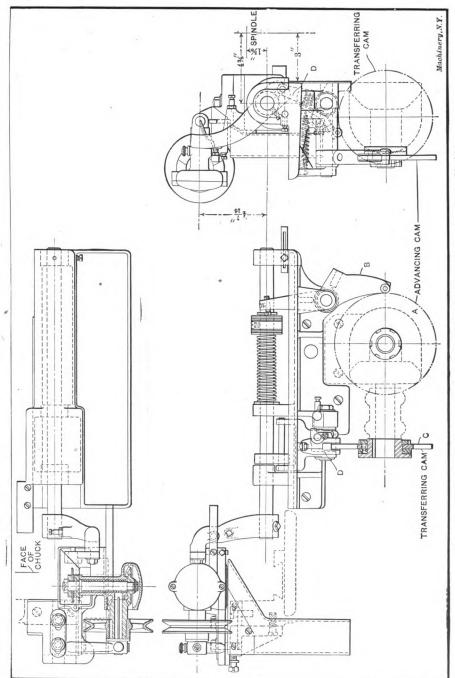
Screw-slotting Attachment for the No. 0 Brown & Sharpe Automatic Screw Machine
